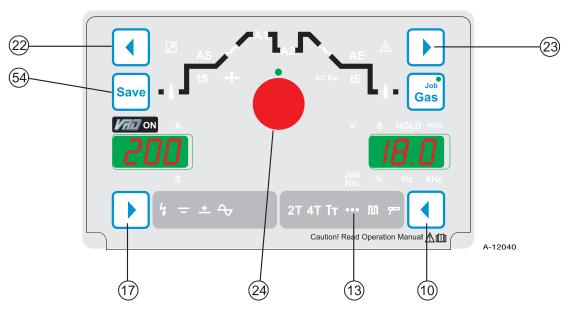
GTAW Spot Welding Mode with DWELL Time
